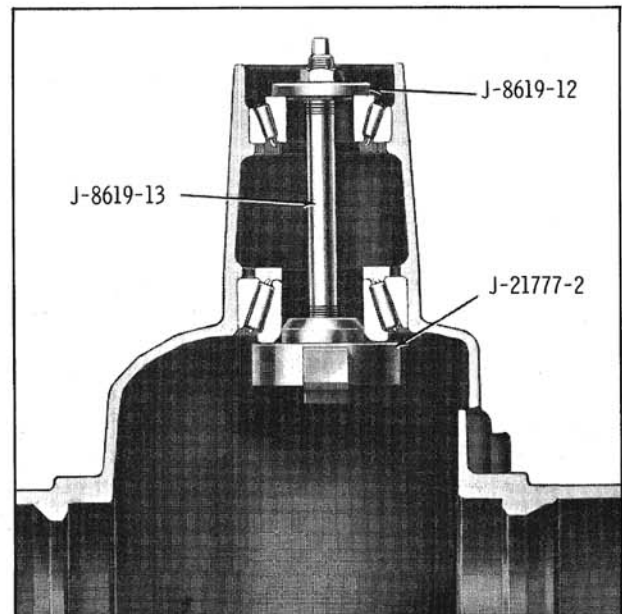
Installing Gauge Plate (33 through 52 Series)
